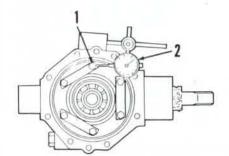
Use a dial indicator (2) to measure ring gear (1) backlash. Refer to text for adjustment.
